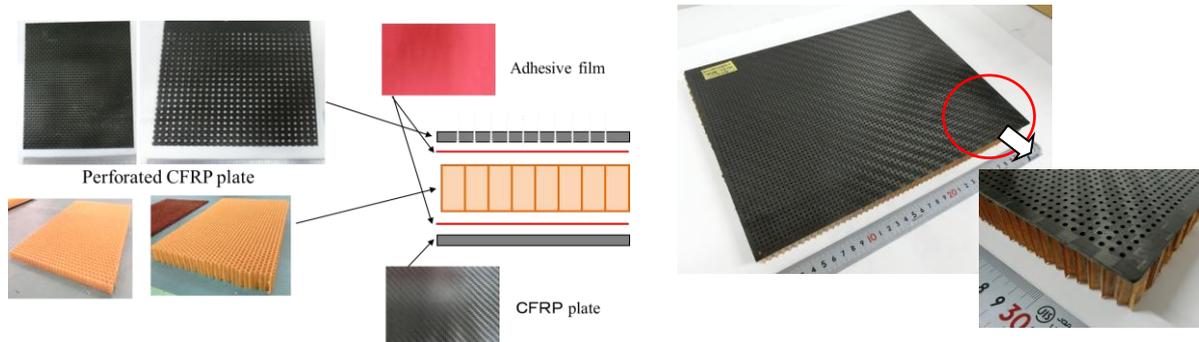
Components and structures of sandwich panel for adhesive assembly (left), and photos of the prototype sound absorbing panel after assembly (right)
